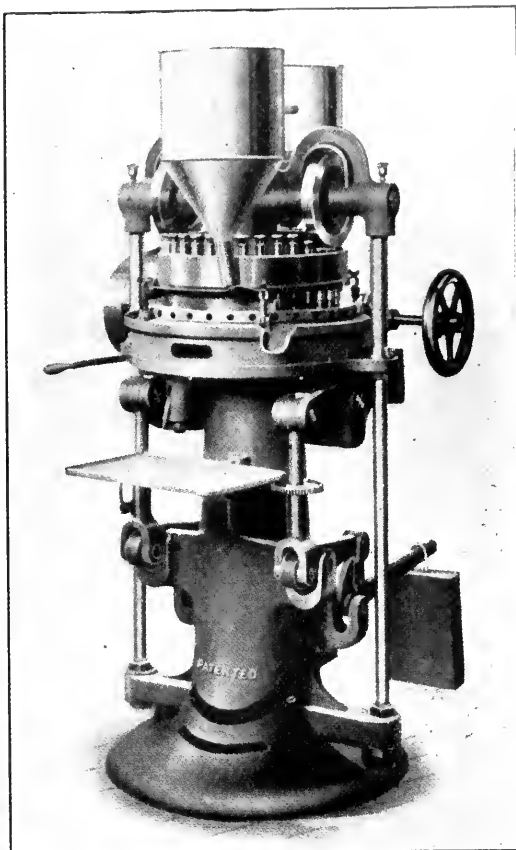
Clark rotary tablet machine (Stokes Machine Company).
